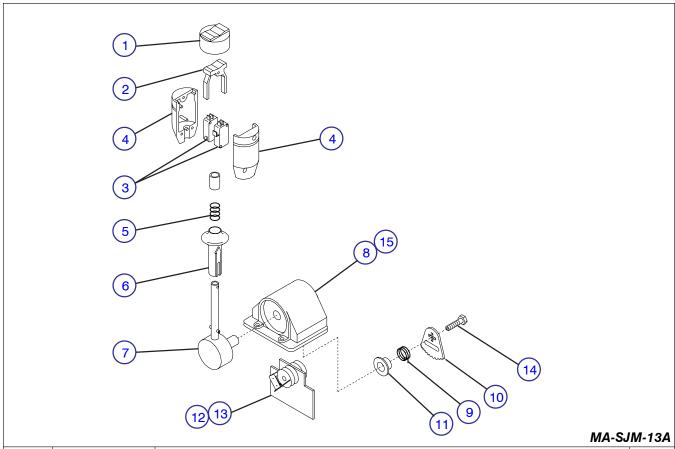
A. DRIVE/STEER CONTROLLER ASSEMBLY (Used on Machines With Serial Numbers 33189 and Above)
